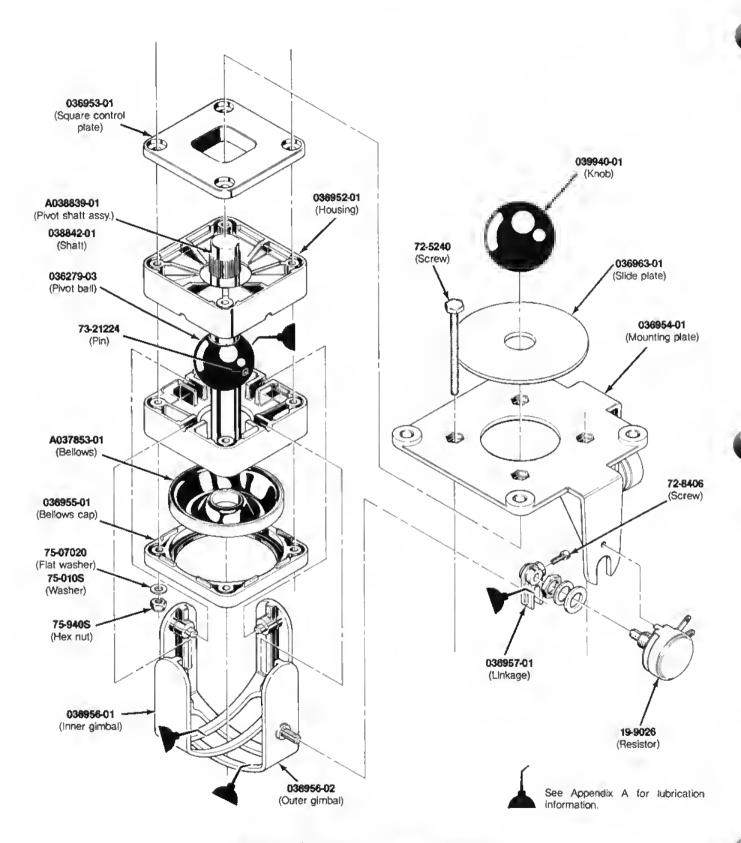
Gimbal Joystick Assembly A038838-02 A
